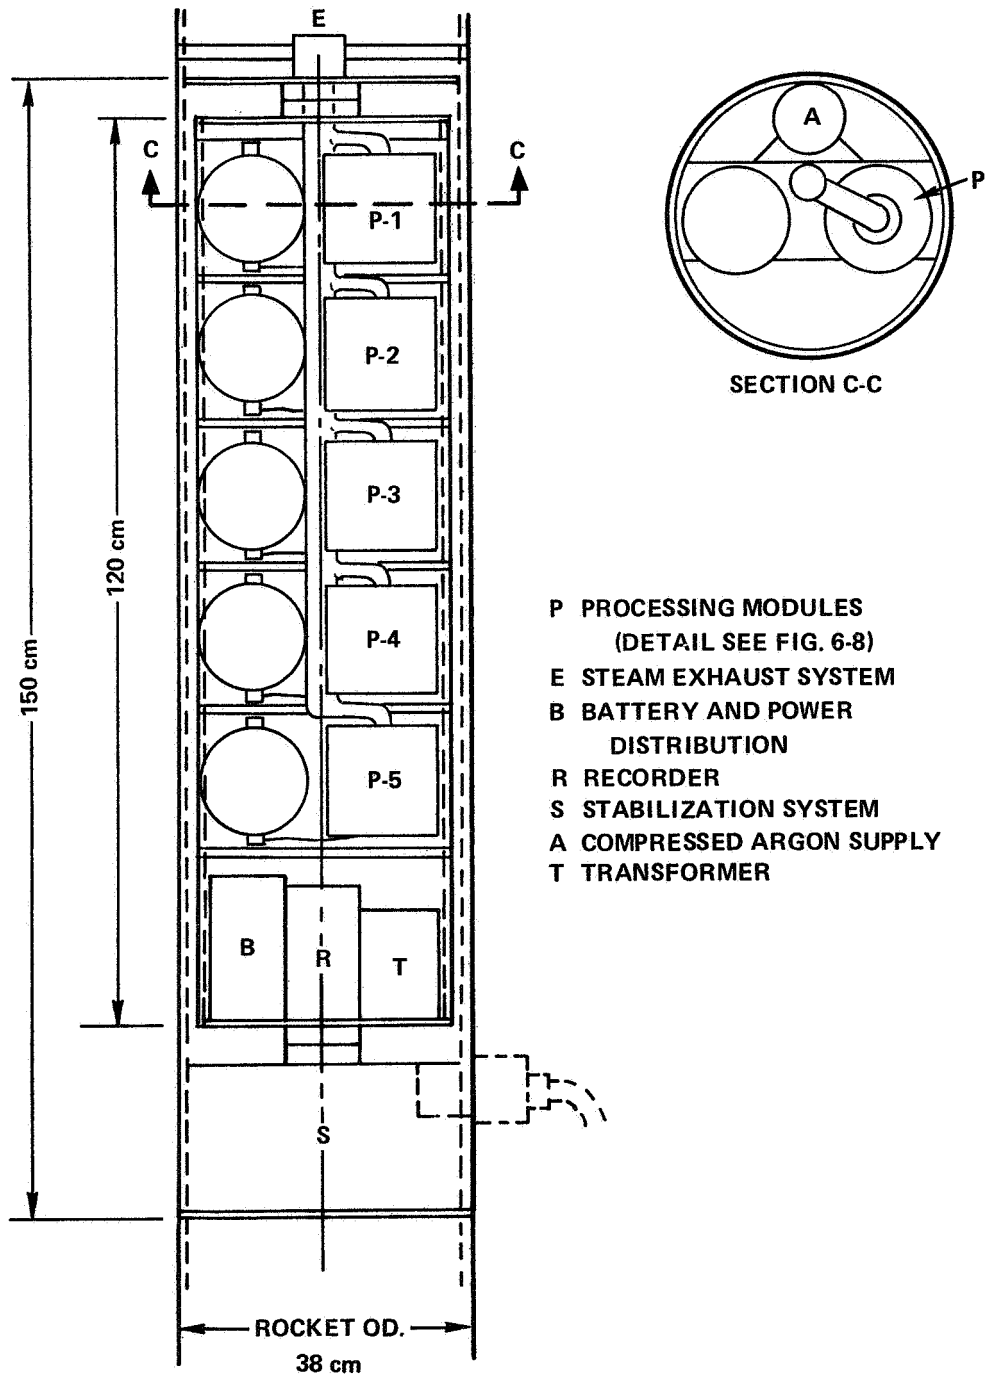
Payload Assembly — Fiber/Particle Composites
